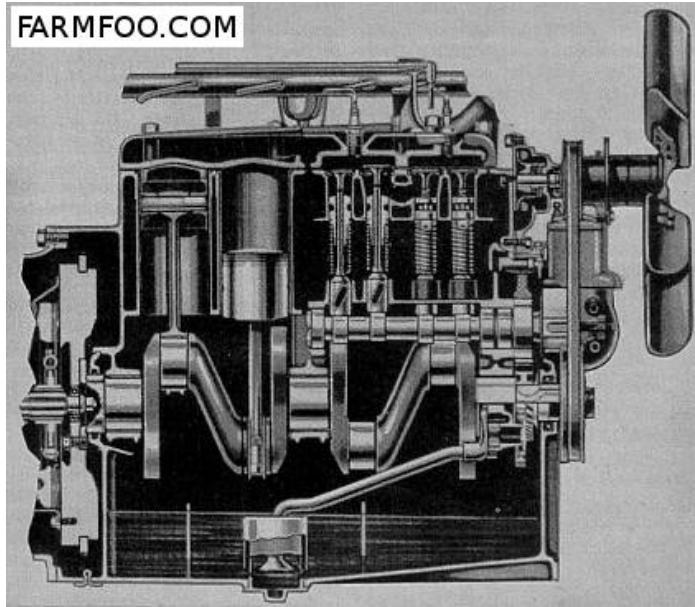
Cross section view of engine used in models 2N-8N-9N.
